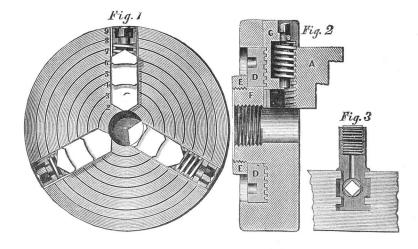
is a front view of the chuck with one of the jaws reversed.
